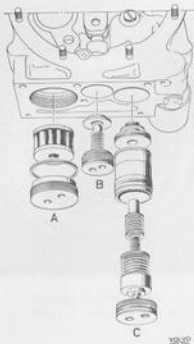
Fitting fine filter, oil pump check valve and relief valve
